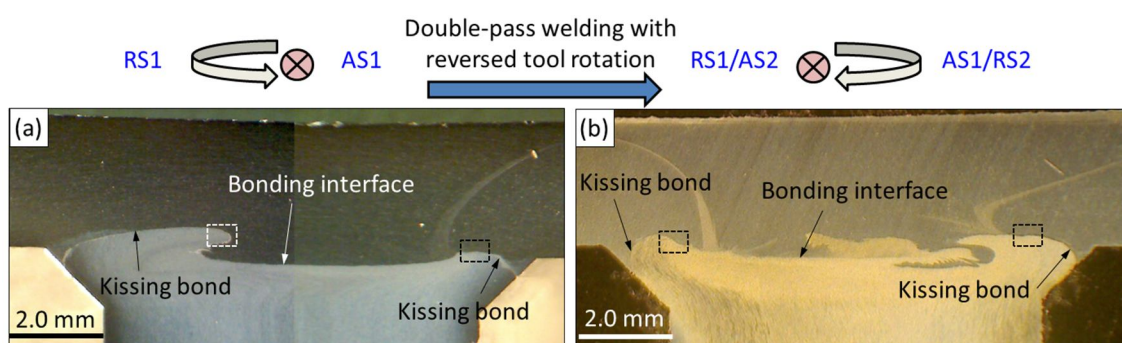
Macrostructure of welding interface produced by (a) single- and (b) double-pass FSWs at offsetting 0.0 mm.
